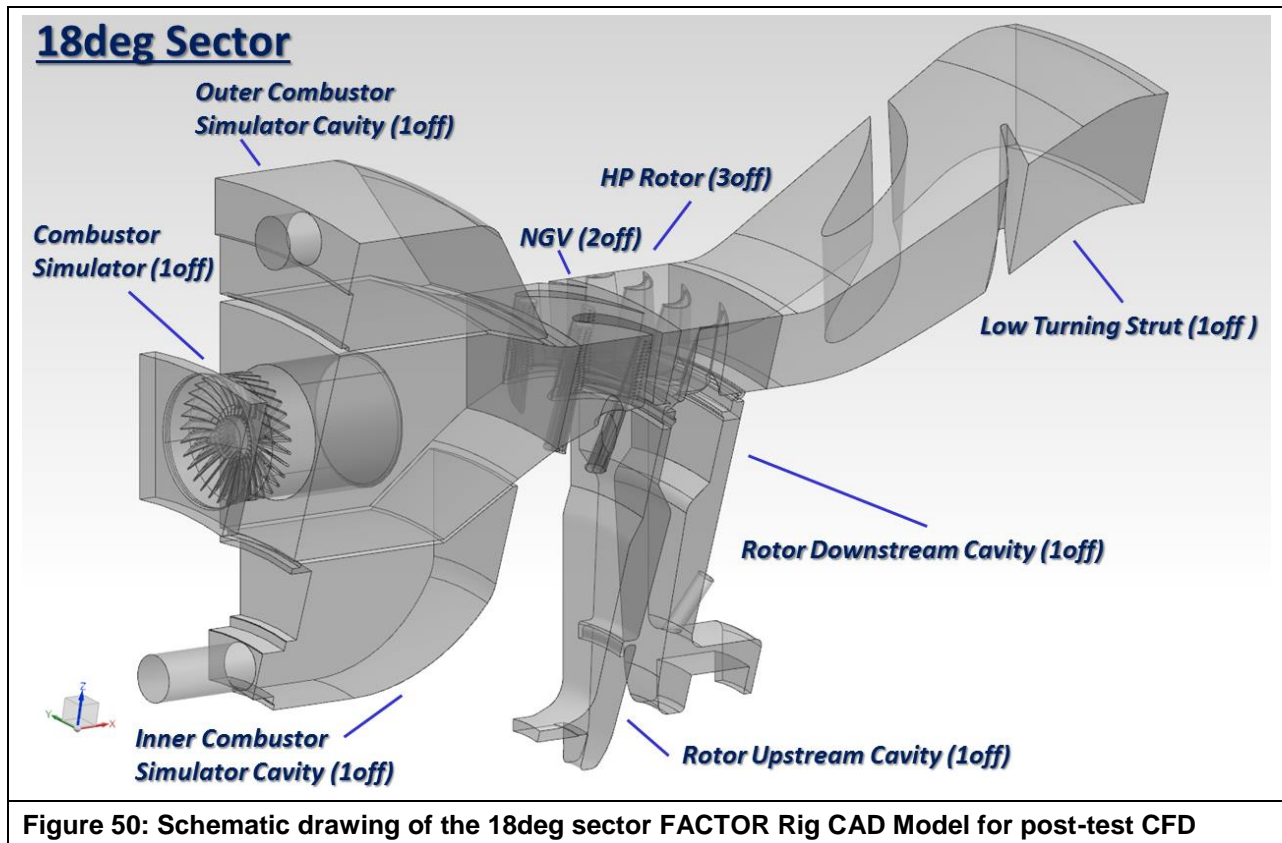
Schematic drawing of the 18deg sector FACTOR Rig CAD Model for post-test CFD
